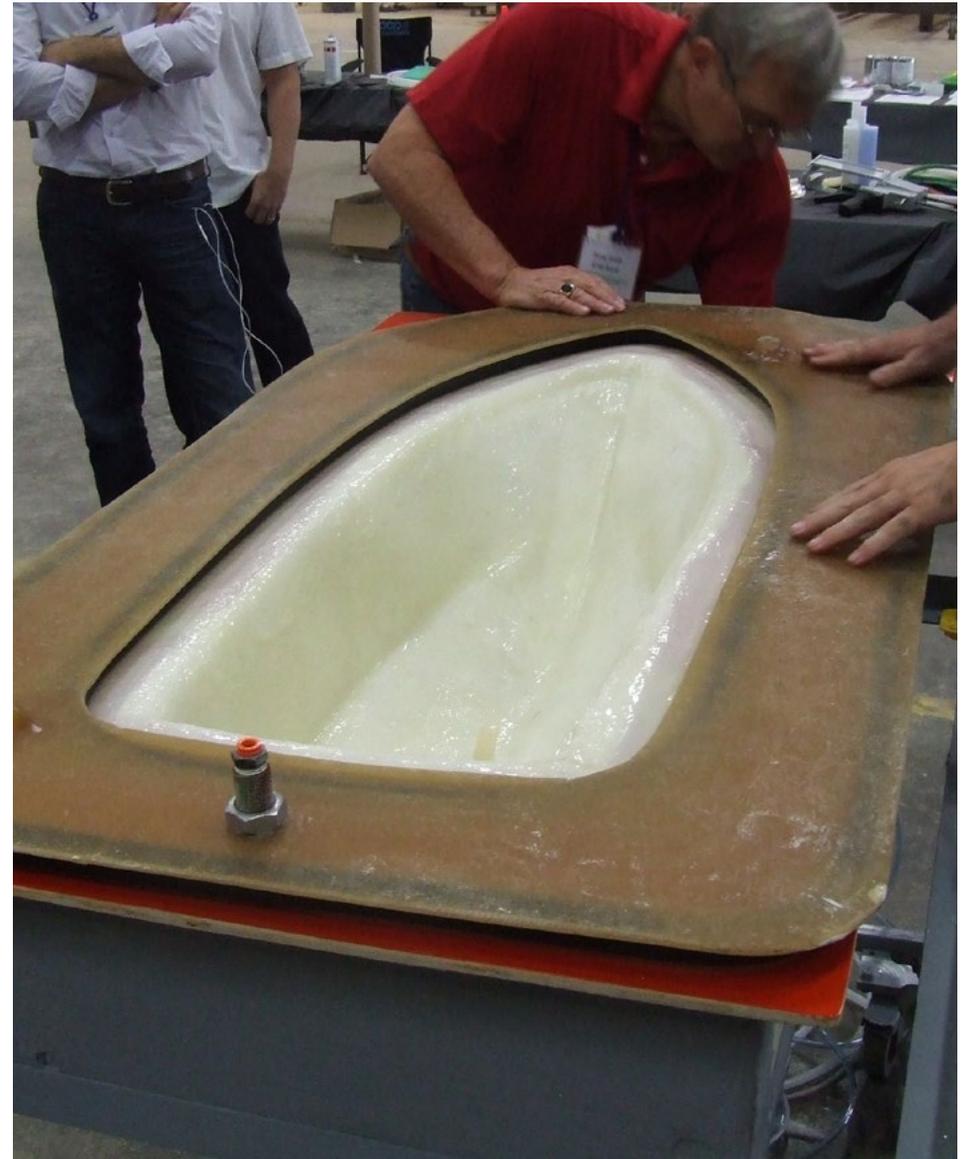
and 34b: Shows the sealing flange being lowered onto the mould.
